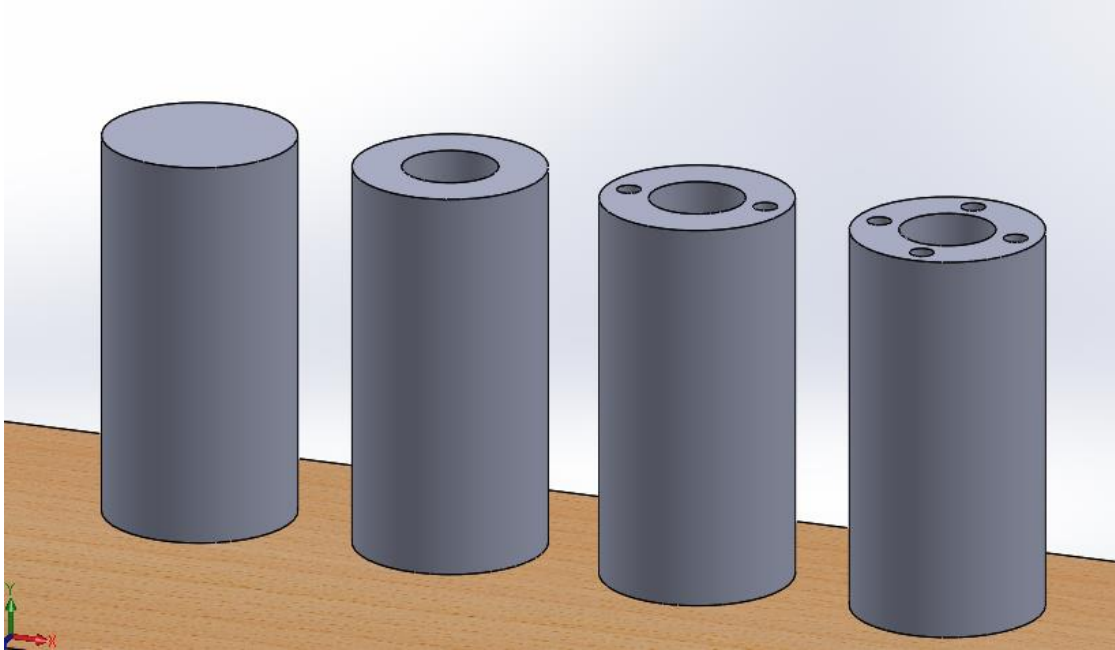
SOLIDWORKS 3D view of core geometries Core 1, Core 2, Core 3, and Core 4 (from left to right)
